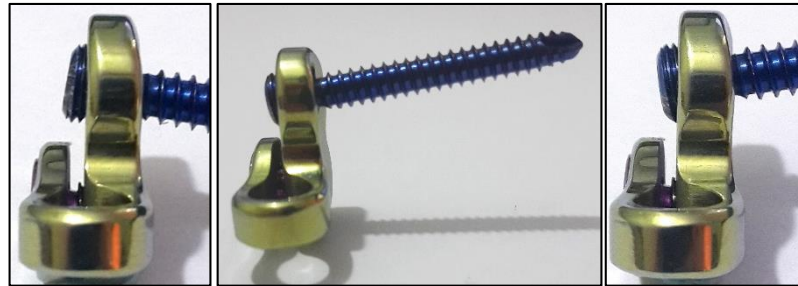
Protrusion of the screw head in angled placement (Left: Downside tilt, Right: Upside tilt) and picture of the connector and screw with 10° upside tilt angle.
